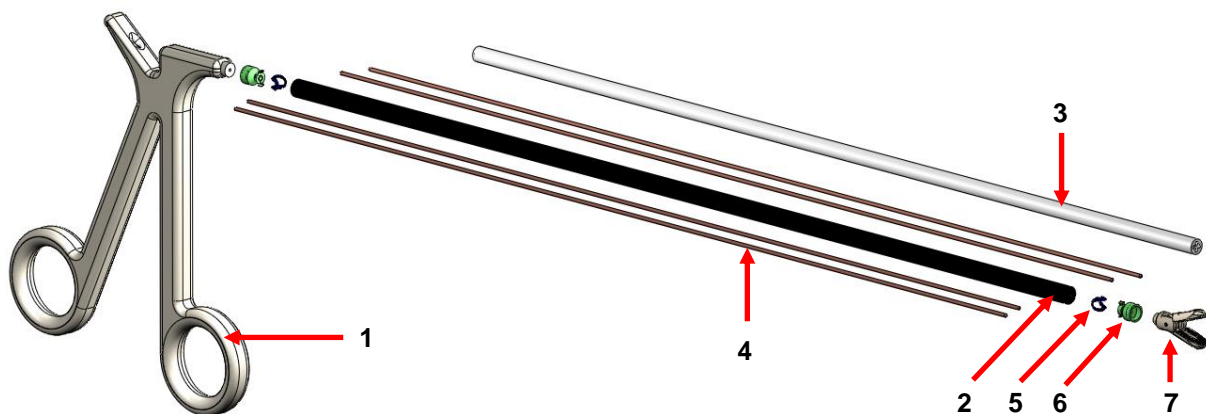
Overview 5mm design Holes concept. 1: handle, 2: shaft, 3: support element, 4 rod, 5 cardan ring, 6: joint, 7: tip.
